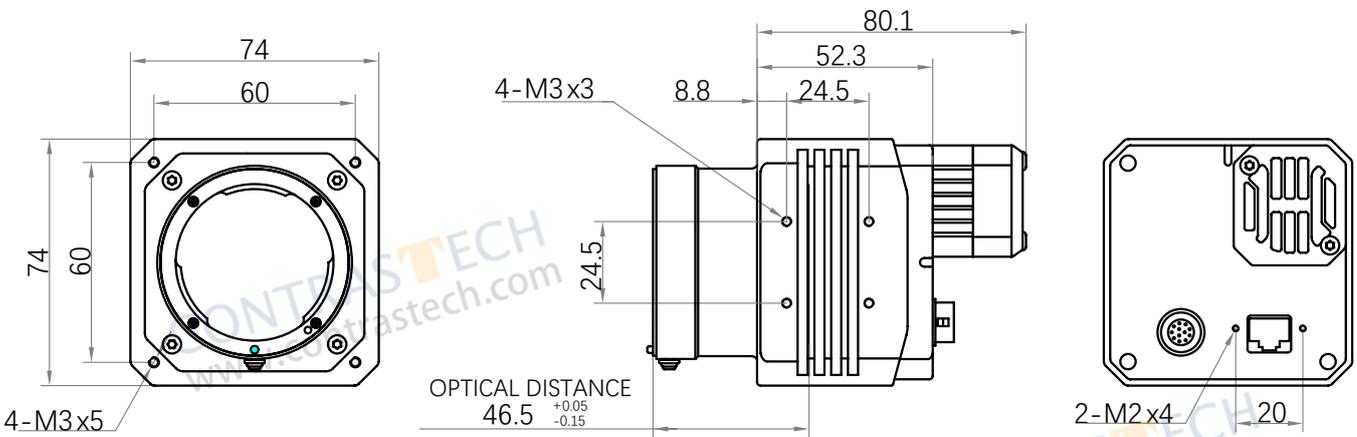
Mechanical Dimensions of the F-mount GigE Cameras with 74 \* 74 \* 80.1 mm housing (With fan, the installation uses M3 screws).
